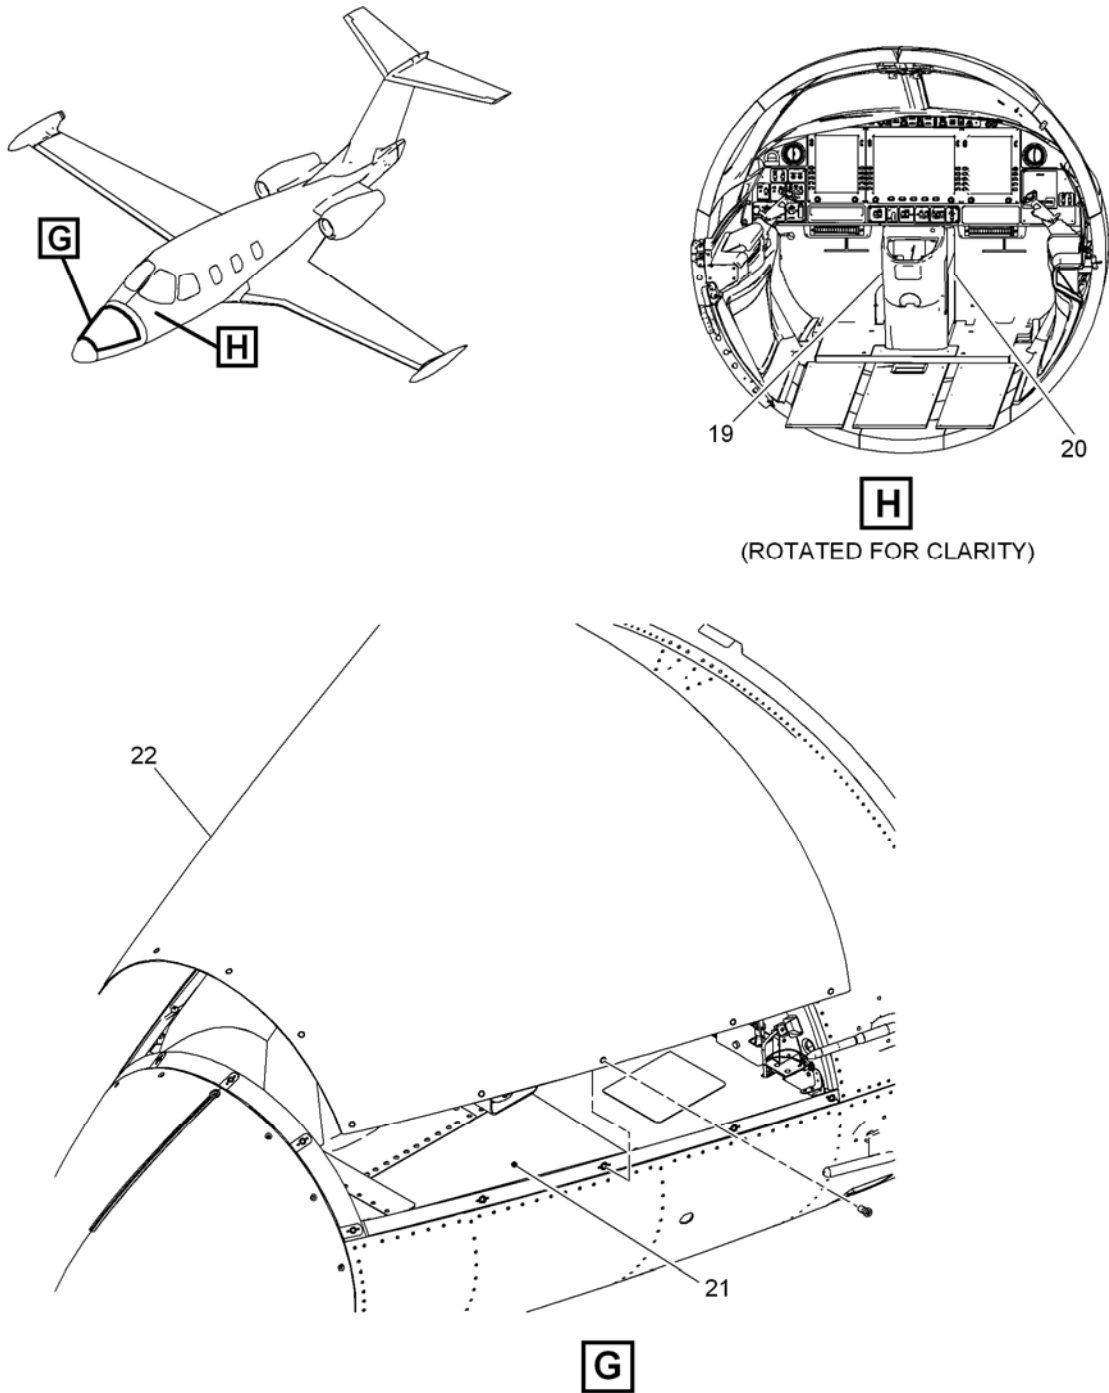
Initial Set-Up Before Removal and Installation of Pitot/AOA Assembly (Sheet 4 of 4)
